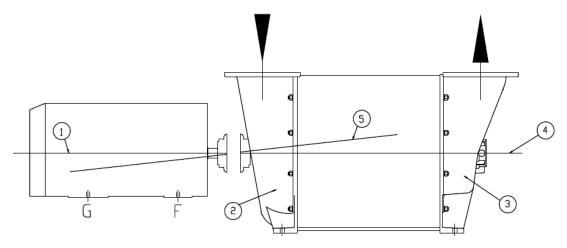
Calculation of the adjustment with the motor on the inlet end
